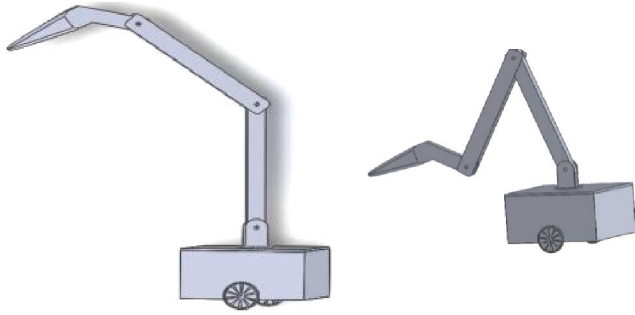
Proposed SolidWorks® model of the mobile welding manipulator.
